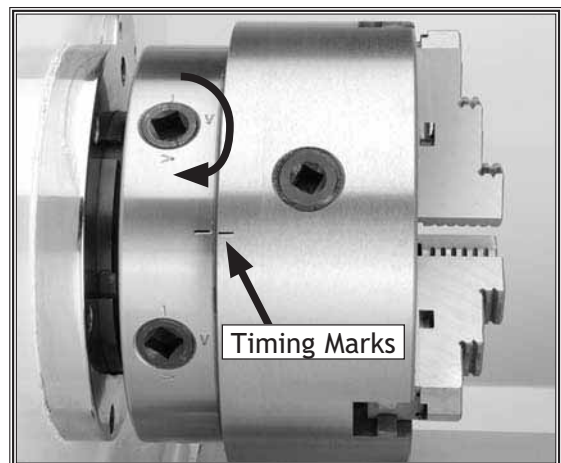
Tightening the camlocks when the chuck is in phase with the spindle.
